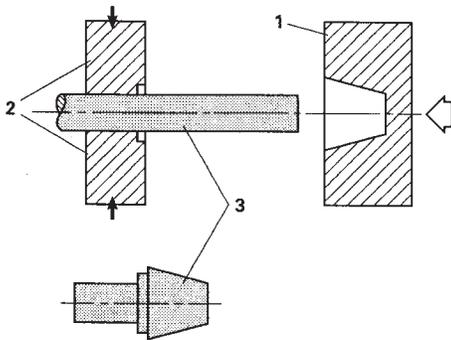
Schematic of the cold heading process. 1, punch; 2, die; 3, forging
